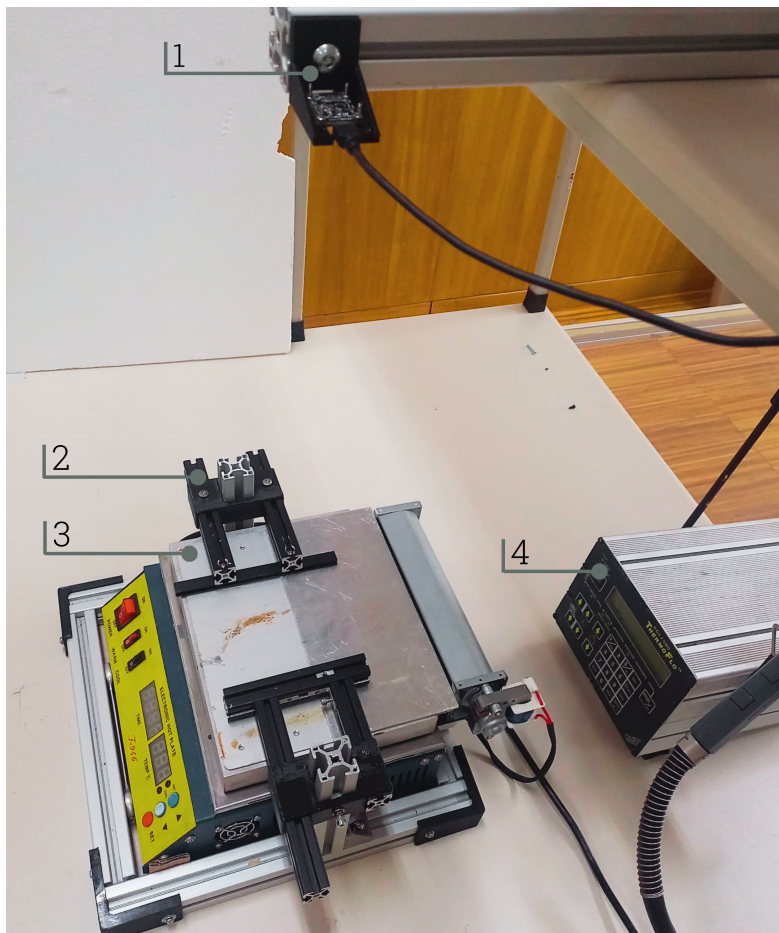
Experimental setup for the robotic disassembly operation of printed circuit board components. (1) thermal camera, (2) support for the boards, (3) hot plate, and (4) hot air device.
